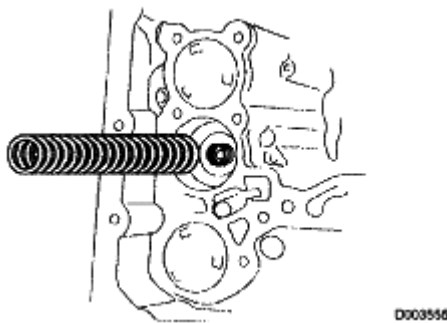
Identifying Spring And C-3 Accumulator Piston
